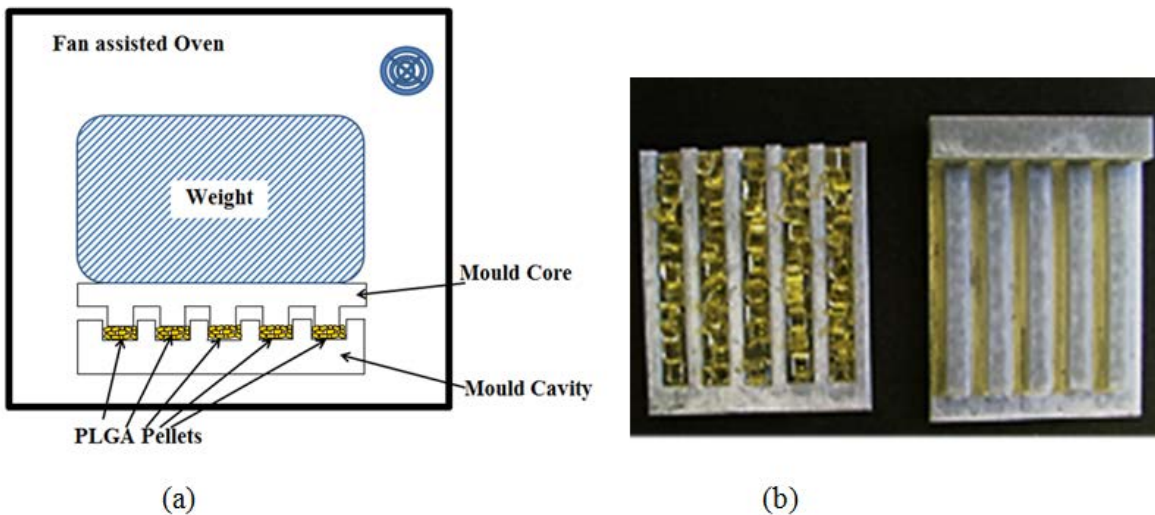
(a) SLA mould in the heating setup and (b) PLGA pellets in SLA mould.
